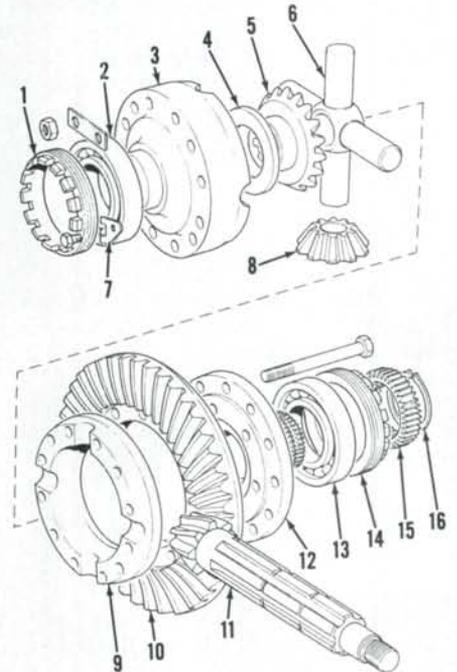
Exploded view of four pinion gear differential assembly used on Models 1594 and 1690.
